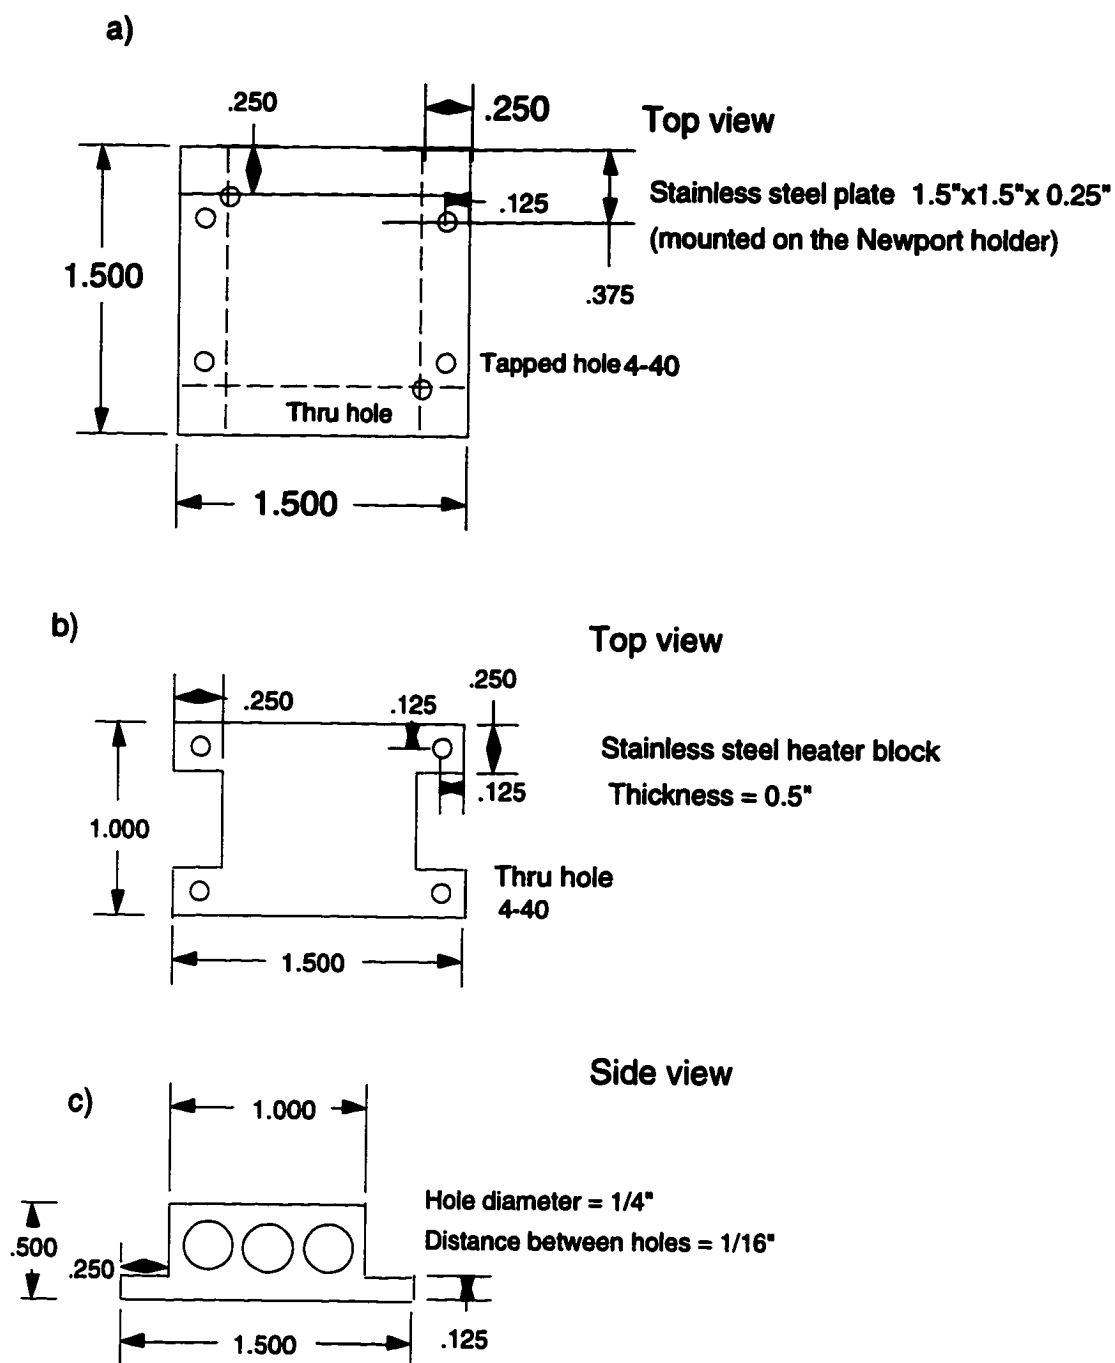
The drawings show (a) the real size of the stainless steel adapter for the sample holder, (b) the top view of the heater block, and (c) the side view of the heater block. The material used to make this heater block was Hanes Alloy #804.
